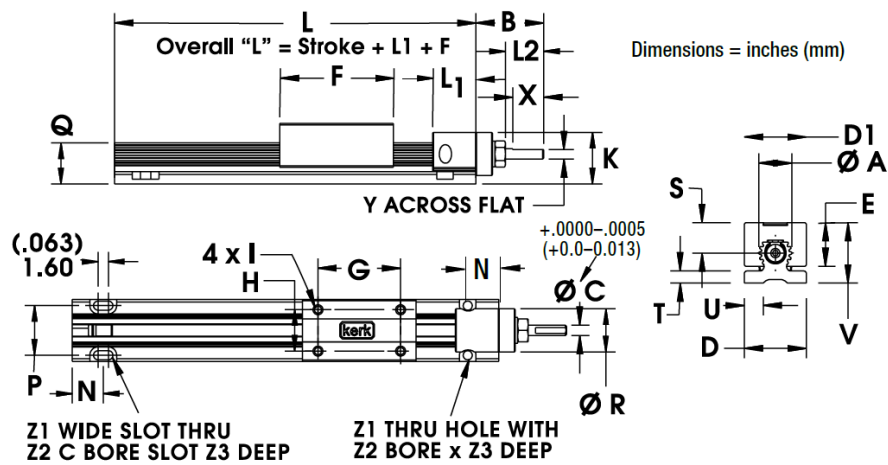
Kerk RGS06 non-motorized linear guide detailed dimensions [19].
